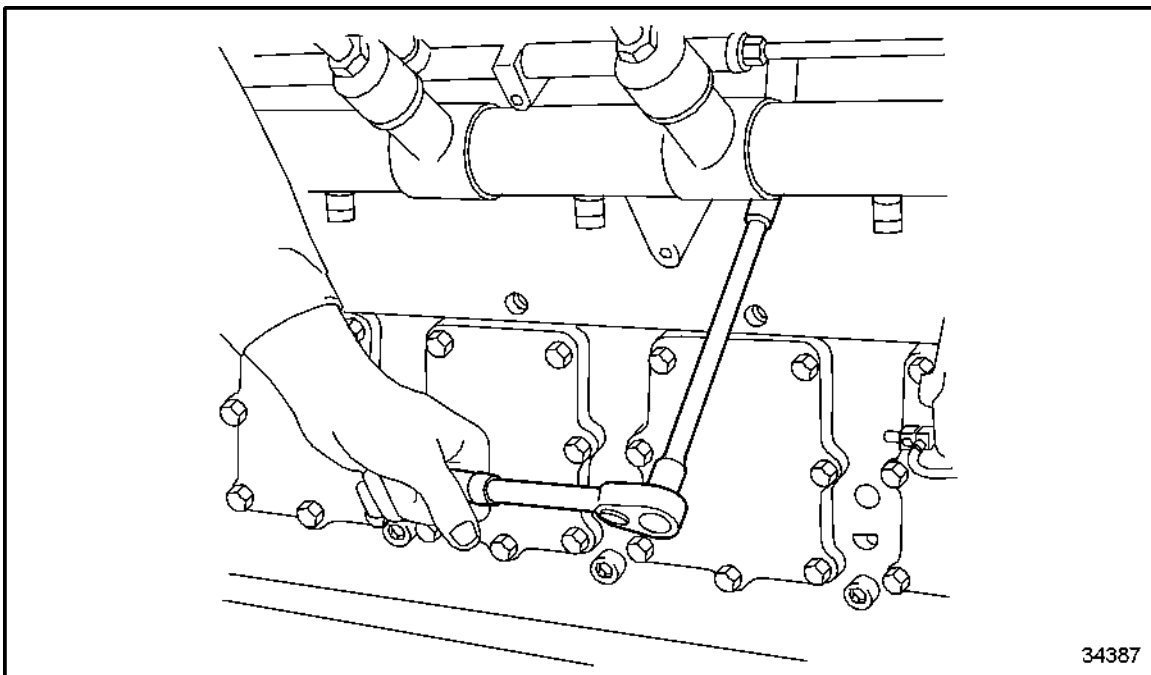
Installing Plug-In Pipes and Connectors from Cylinder Block
